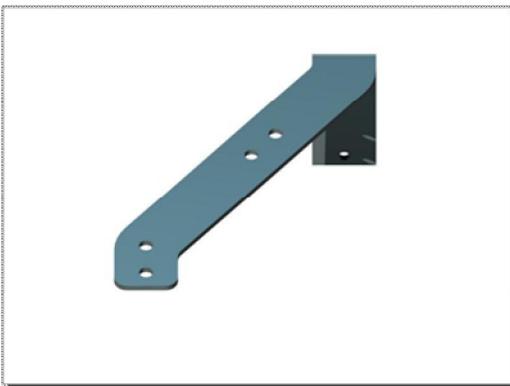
Kerbside Mounting Bracket (667/1/31910/000)
